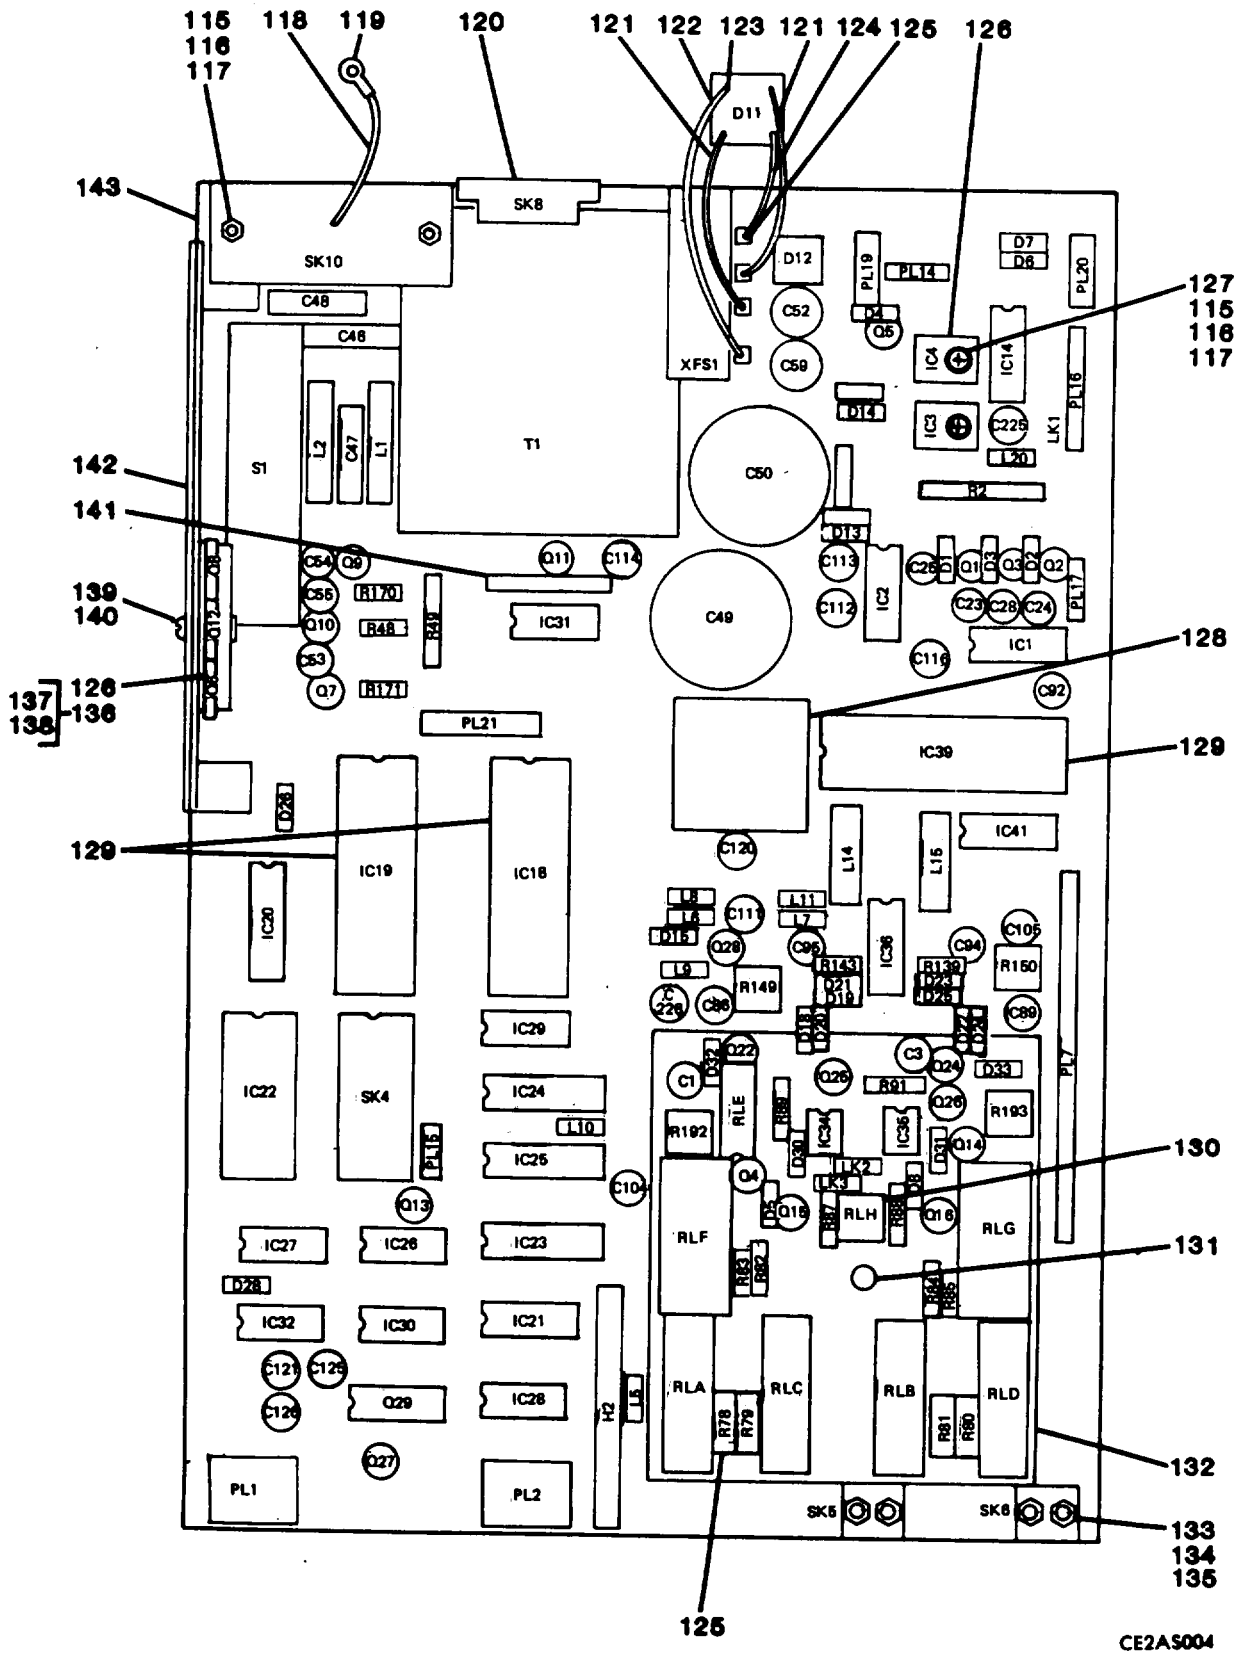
PCB Assy Motherboard (Sheet 1 of 4)
